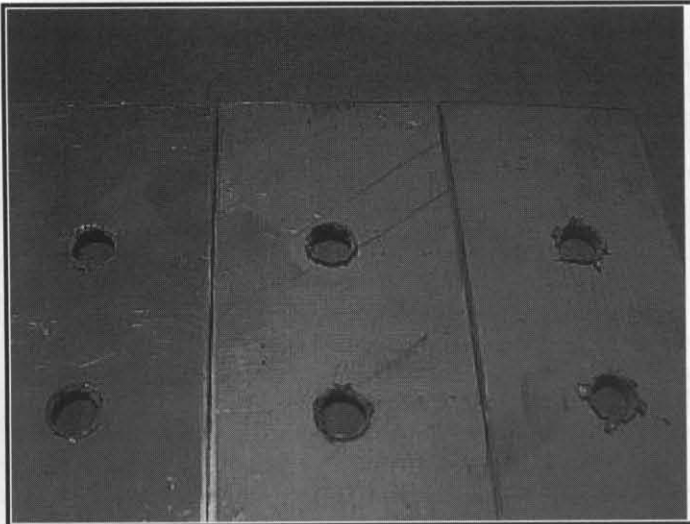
Cratering (burrs) that result when the drill starts getting dull.
